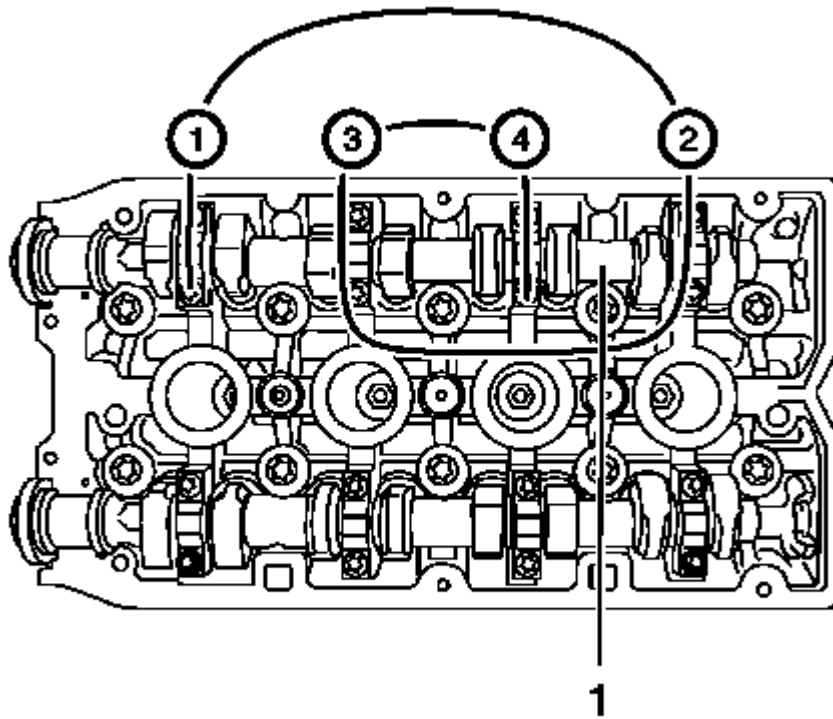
Intake Camshaft Bearing Cap Bolts Loosening Sequence
